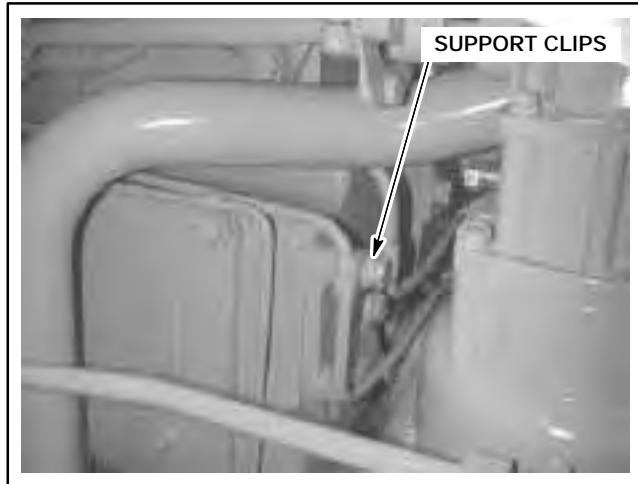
Air/Gas Starter Local Control Tubes
